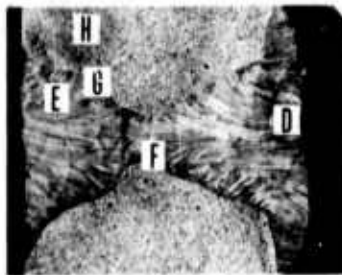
Photographs of weld test plates (as welded) for
